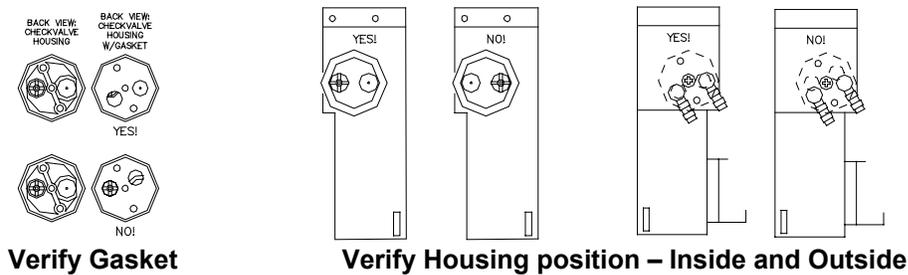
Proper Orientation of Check Valve Housing and Gasket
